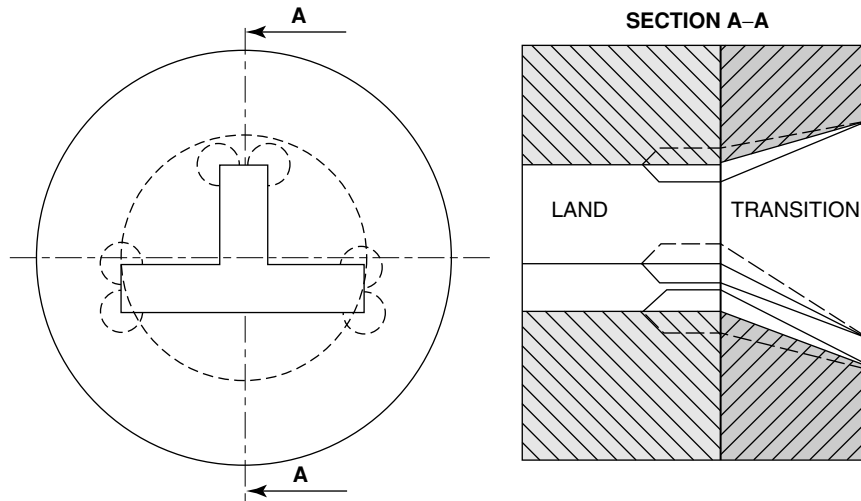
An example of back relieving the corners of a T-shaped profile.
